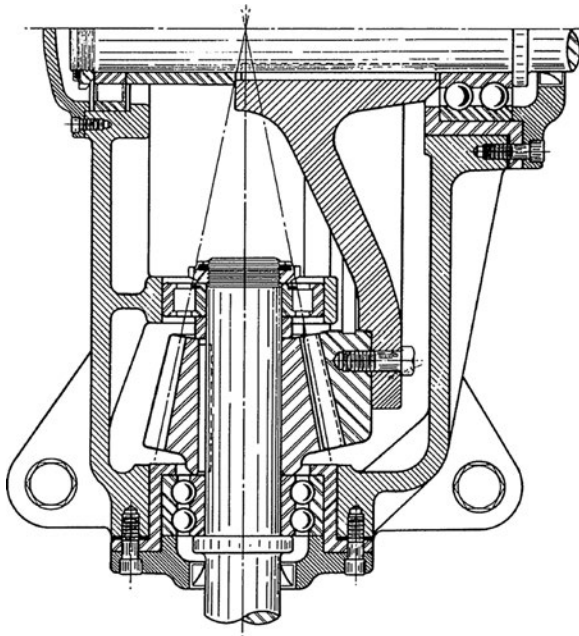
Straddle pinion mounting for short shafts, showing use of combined thrust and radial bearings.
